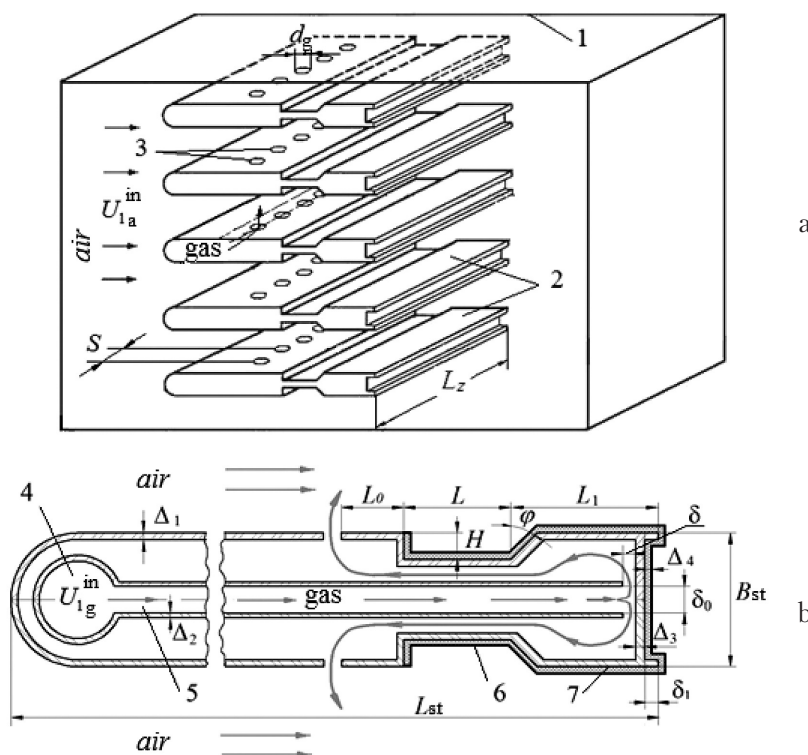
Scheme of the stabilizer burner device (a) and its cooling system (b): 1 – flat channel; 2 – flame stabilizers; 3 – gas supply holes; 4 – gas supply manifold; 5 – channel for cooling gas; 6 – niche cavity; 7 – coating
